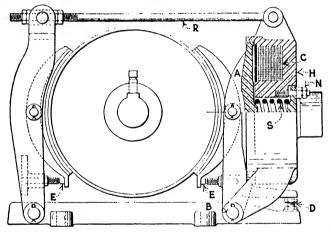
Shows general arrangement of the parts of the brake, Fig. 119.
